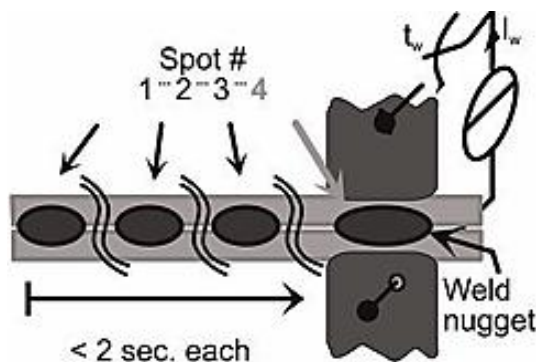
Diagram of the weld sequence used to create overlap shear specimens' HAZ cracks [33].
